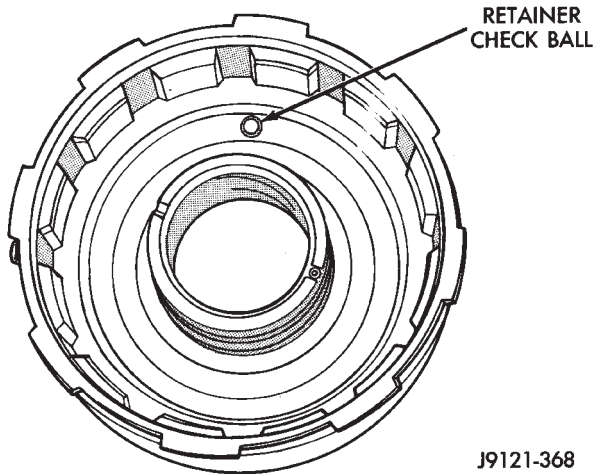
Front Clutch Piston Retainer Check Ball Location
